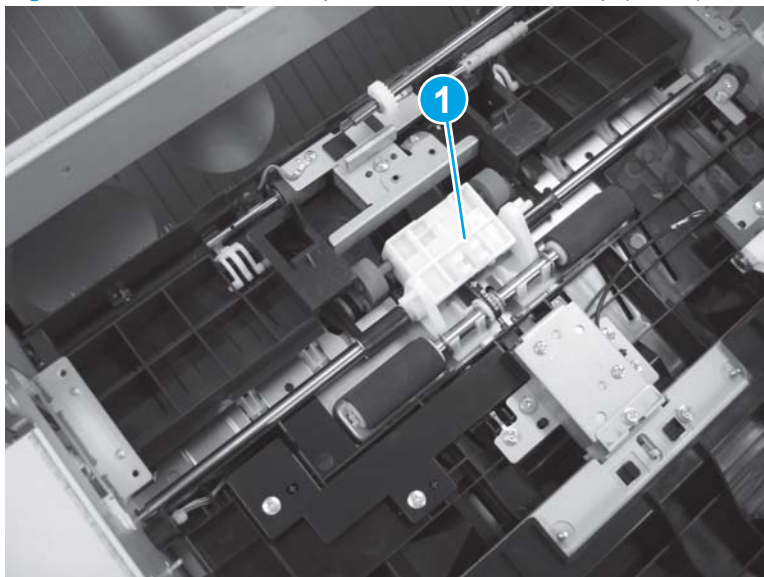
Remove the pressure roller assembly (7 of 8)
